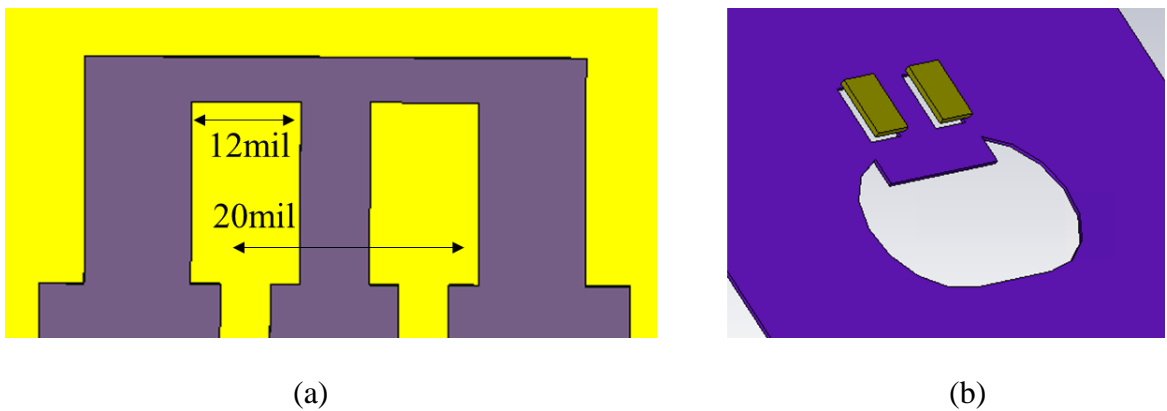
(a) The pad size is enlarged to 12 mil width, (b) the slots below pad.
